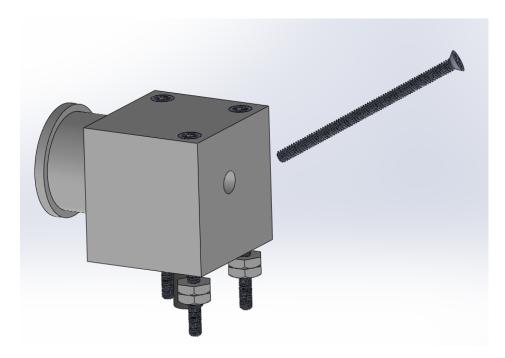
Remove the anode, anode ring terminal, lock nut and any washers. You can use an attached thruster screw (used to attach the thruster to the board) or any other small, blunt object to push the inner ceramic out. This should be done at an angle (shown) to push the back edge of the inner ceramic.
